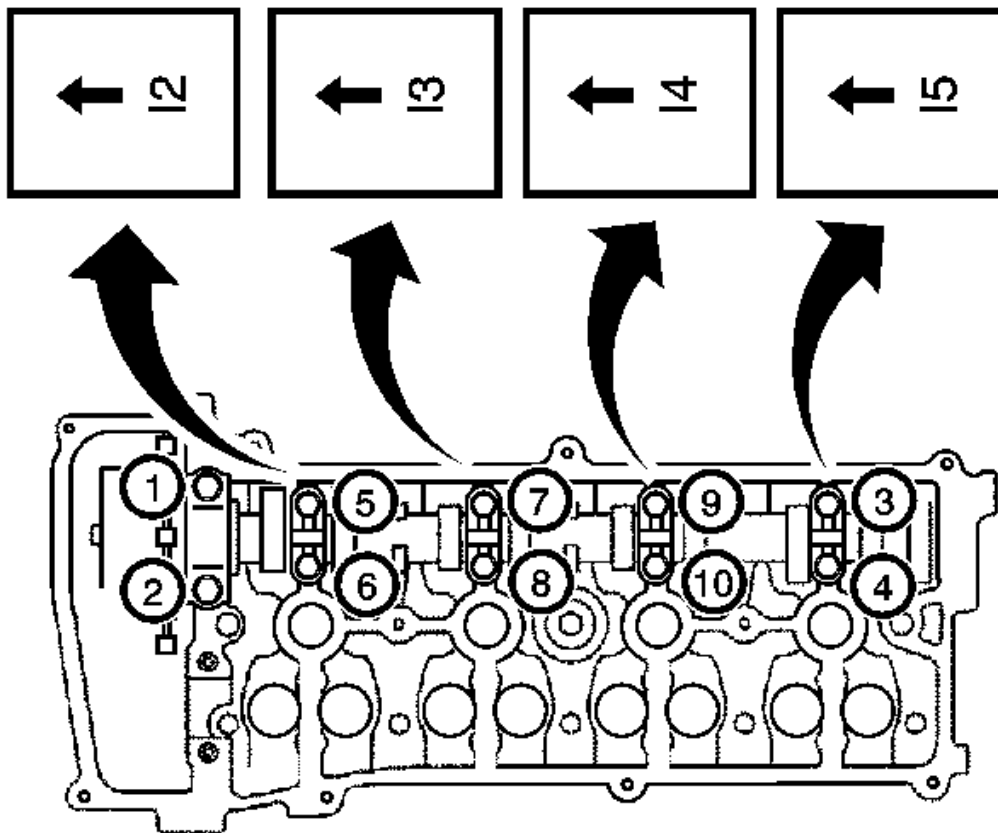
Identifying Bearing Cap Bolt Removal Sequence
